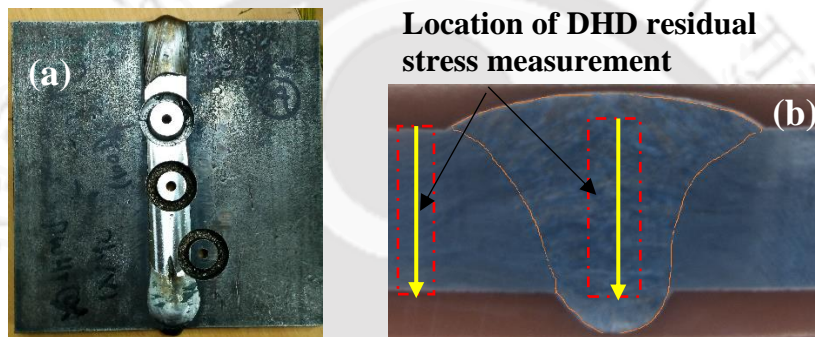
(a) Weld sample after drilling and trepanning, (b) Locations for residual stress measurement
